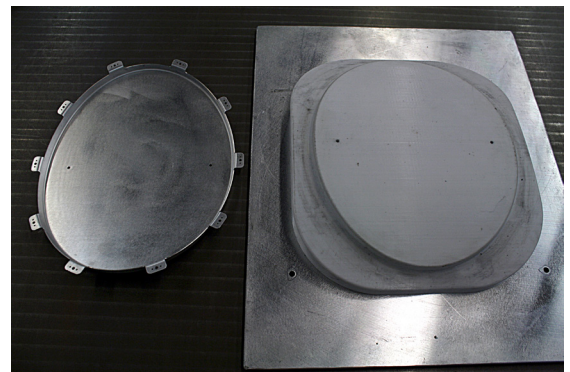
Hydroformed parts at Piper Aircraft using FDM technology.
